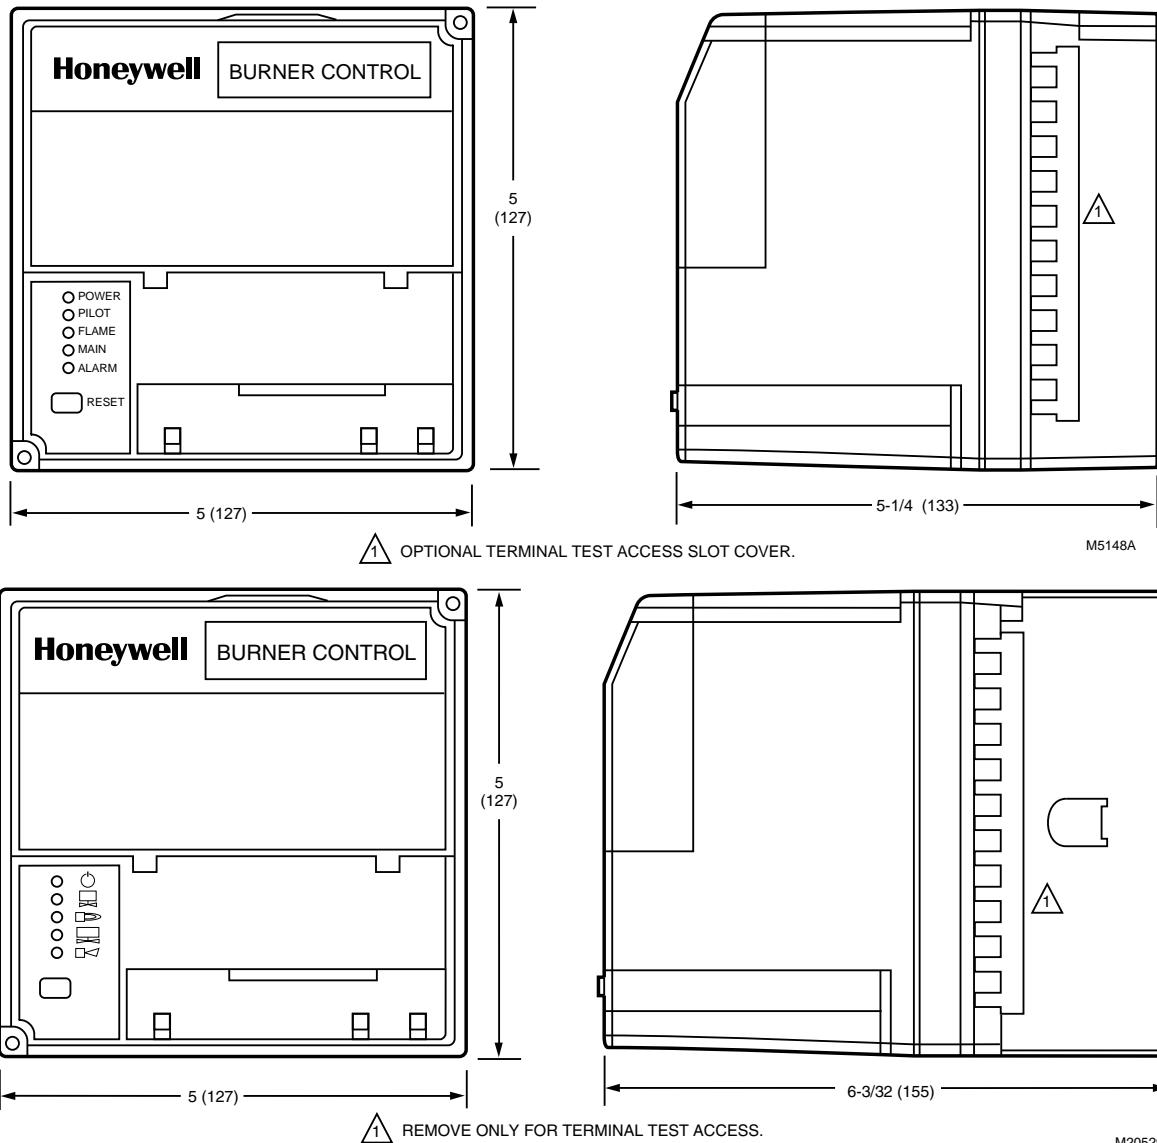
Mounting dimensions of RM7890 Relay Module and Q7800A Subbase (top) and EC7890 Relay Module and Q7800B Subbase (bottom) in in. (mm).
